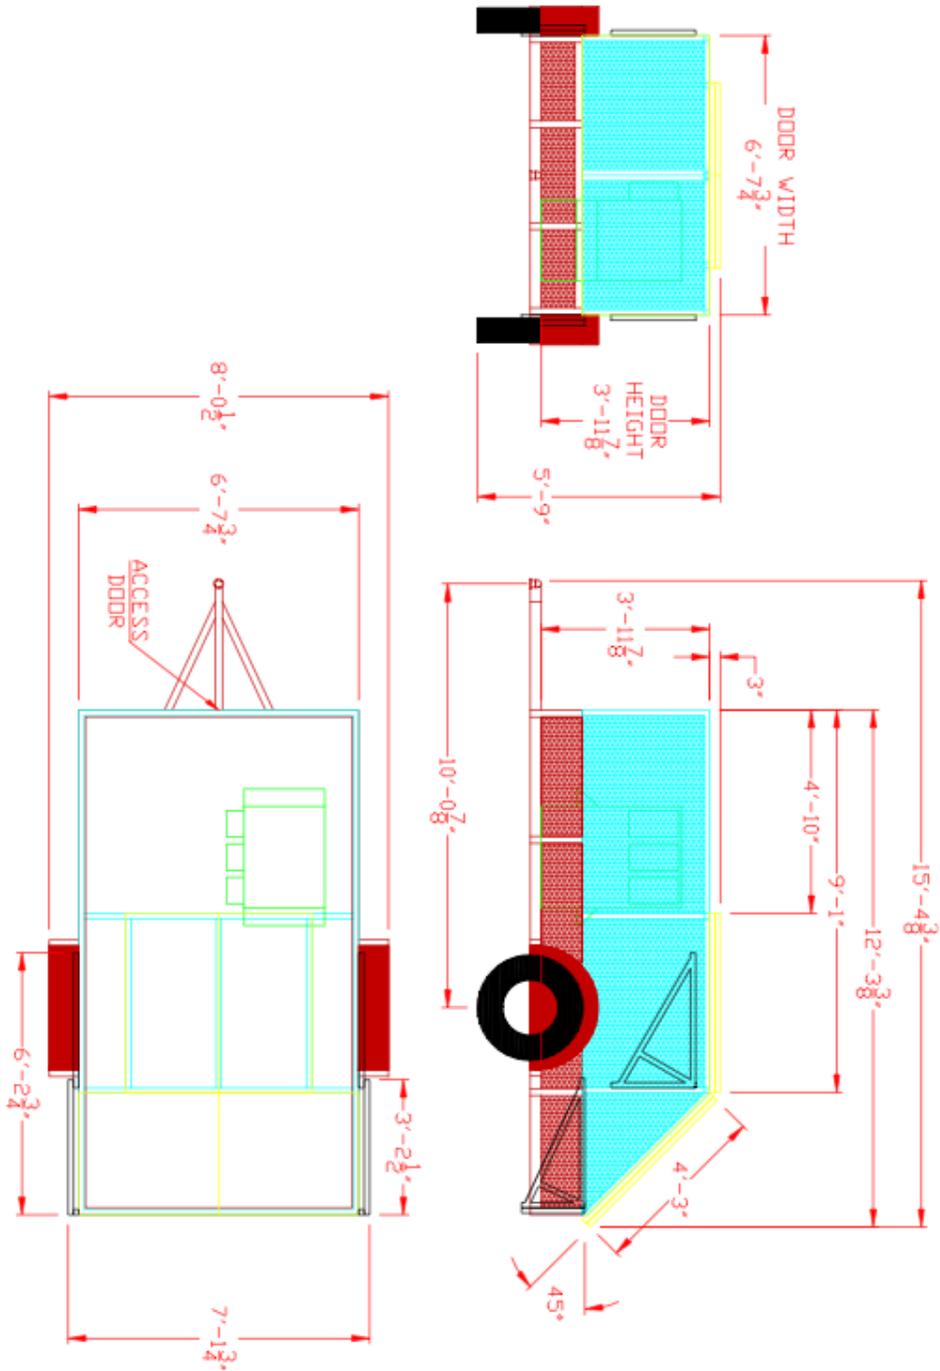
Dimensional Drawing of PV Power System Trailer.
